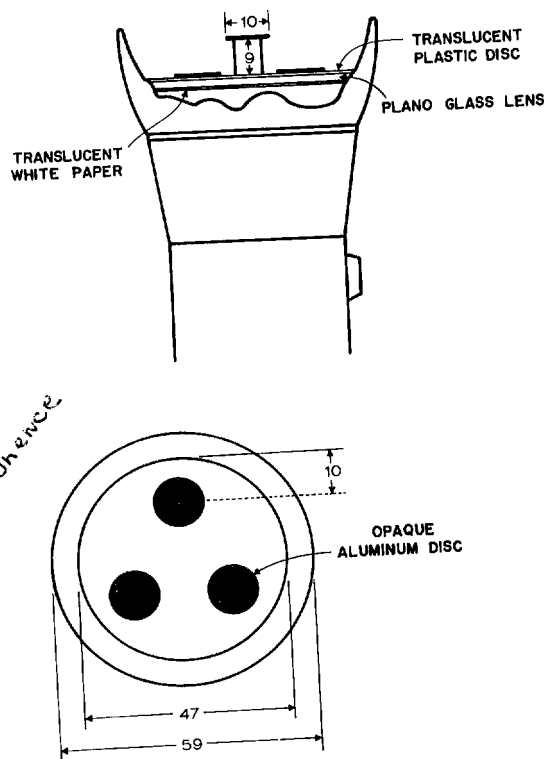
Cutaway illustrating the diastereo test flashlight.
